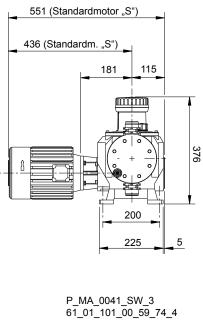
Dimensions # with manual adjustment wheel. Diagram is not strictly binding.
